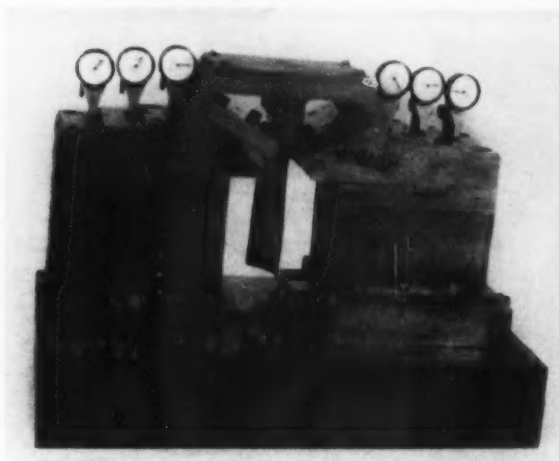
Serrations and faces of the dovetail are checked in this gage.
